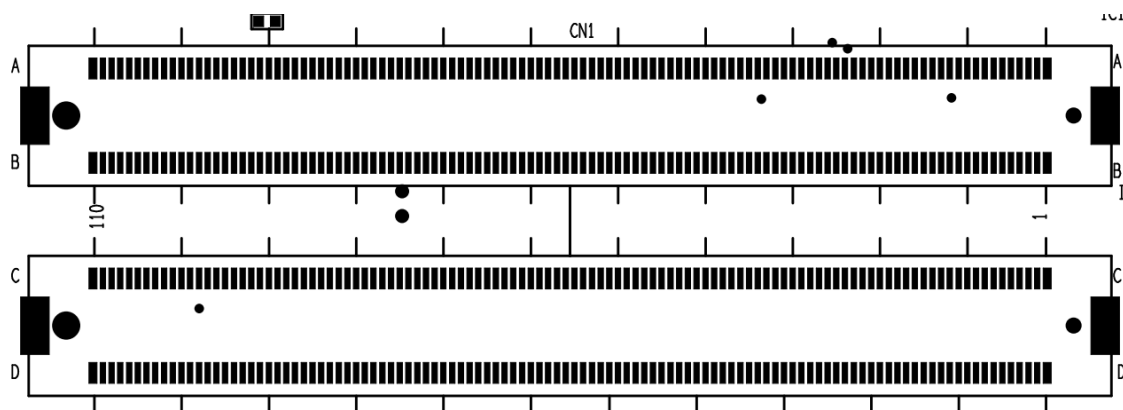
BOARD TO BOARD CONNECTOR COM EXPRESS
